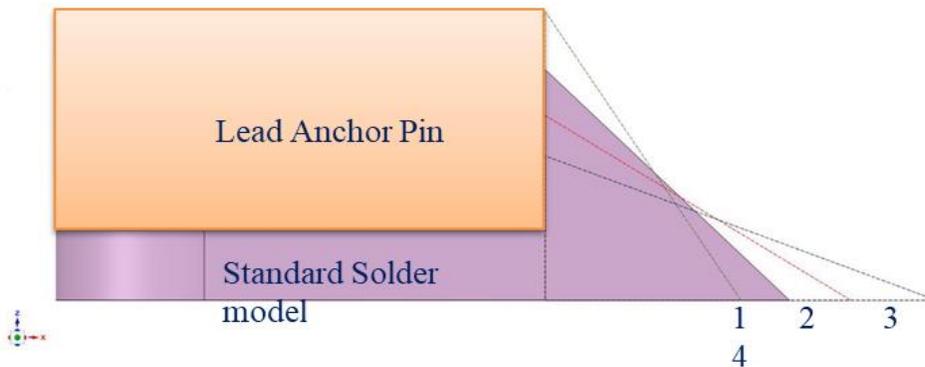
ADDING EXTRA SOLDER MATERIAL FILLET PROFILE
